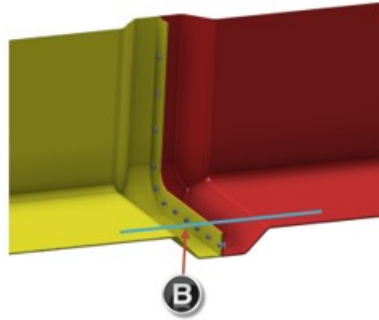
Bolt Connection Inside GRP Beam [41]
